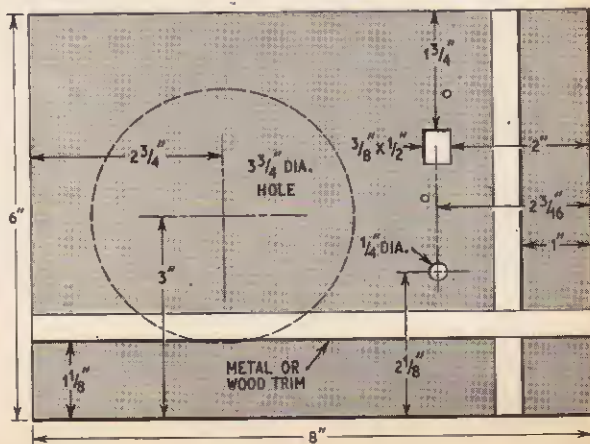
Front panel cutting and drilling details. Suitable material is 1/8in hardboard
